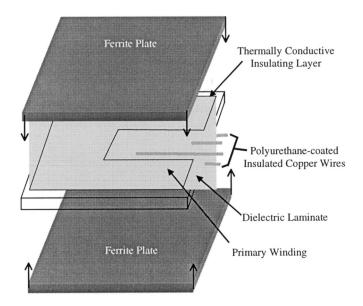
Three-dimensional structure of a PCB transformer shielded with ferrite plates.
